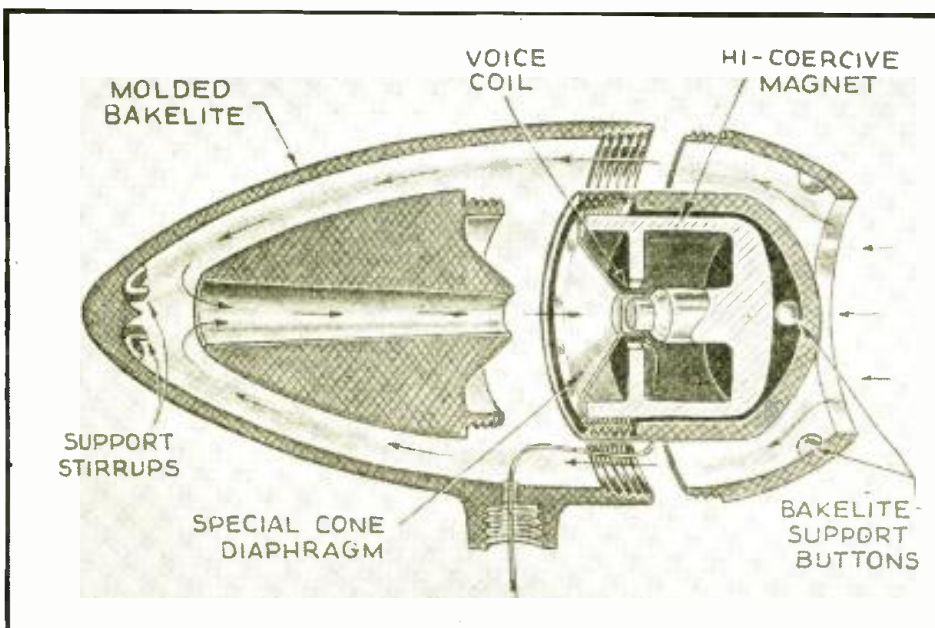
Fig. D. The parts and their method of assembly can be seen in this phantom view.
